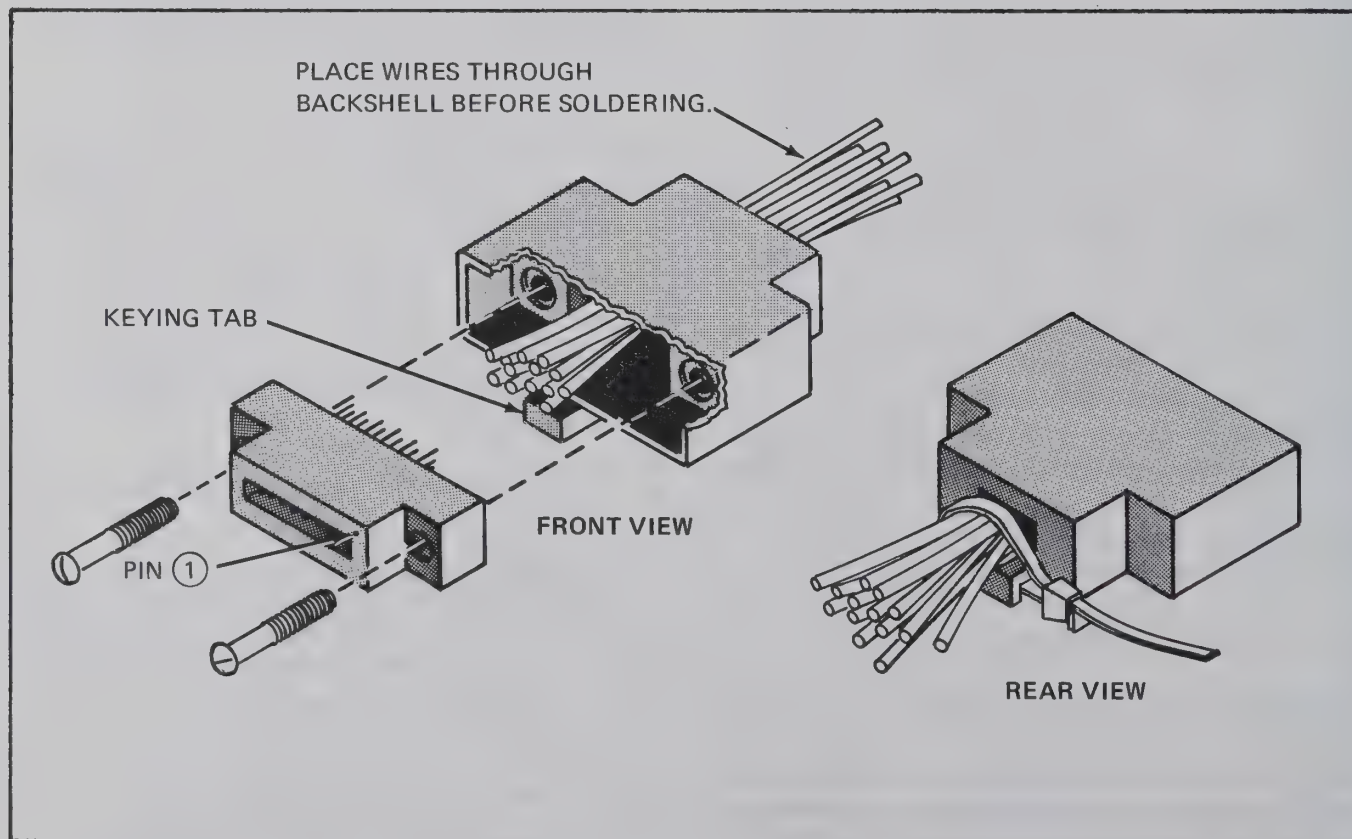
MATING CONNECTOR END OF THE DPOU INTERFACE CABLE
